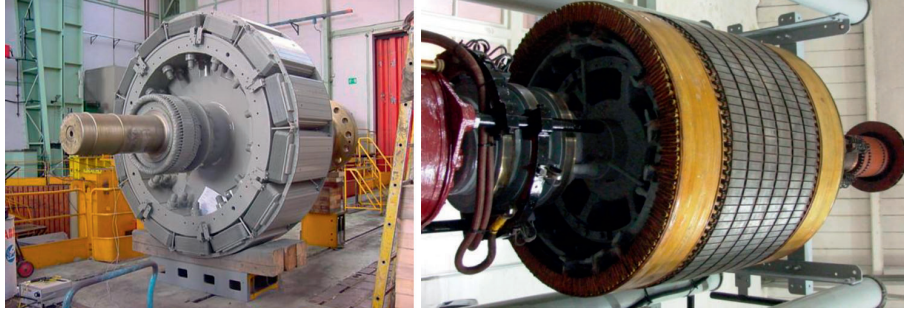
Example of rotor construction of synchronous machine (left) and induction machine. Not to scale [18].
